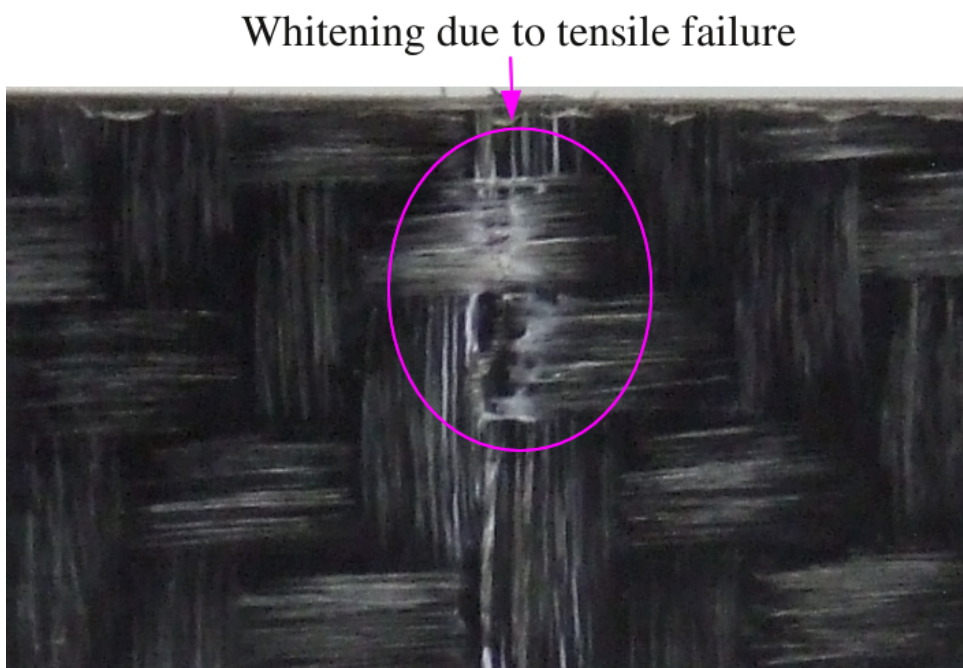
Photograph of typical GFPP specimen after bending test (tensile damage)
